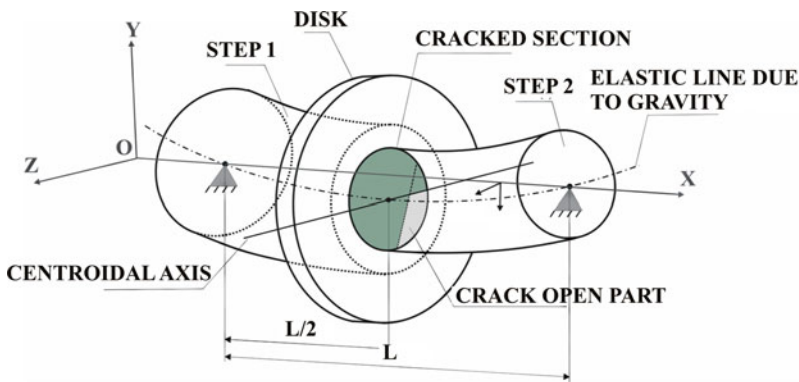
Two step cracked rotor-bearing system carrying a disk
